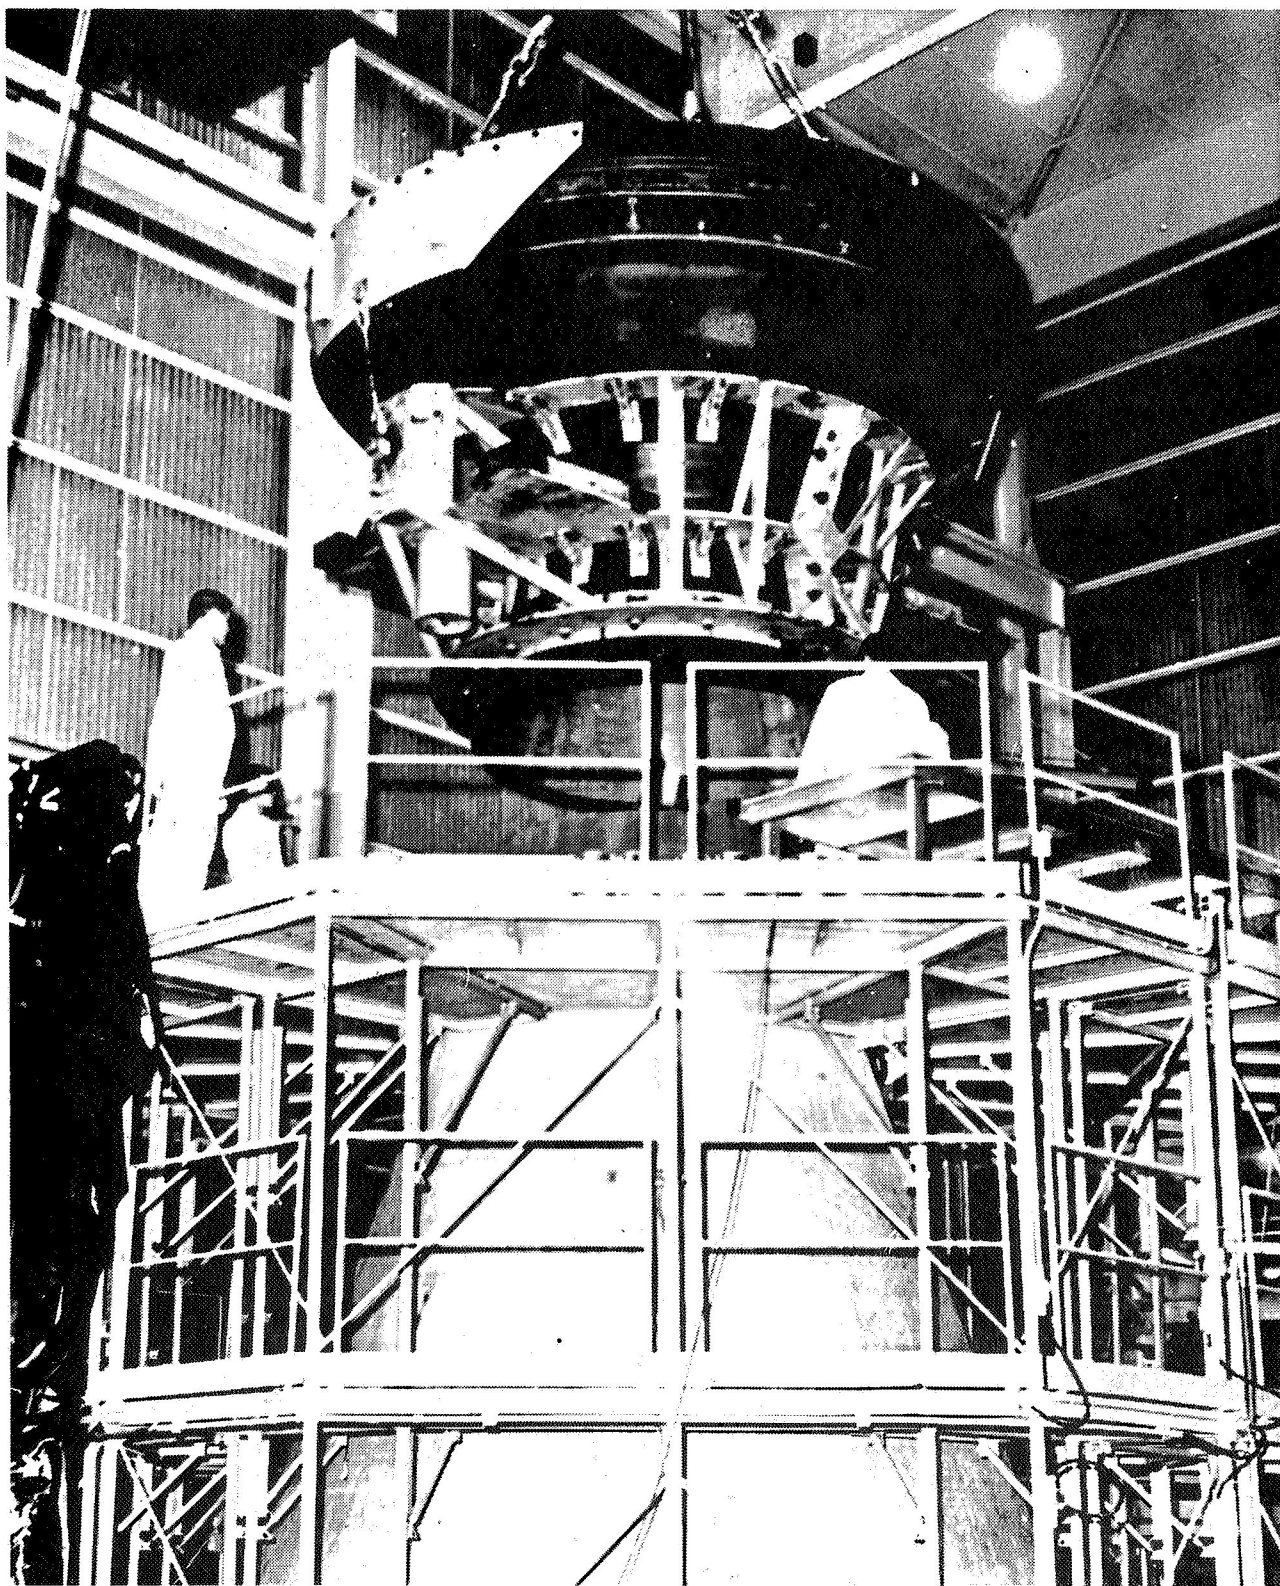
Bonding Assembly - Shell to Divergent Stack
